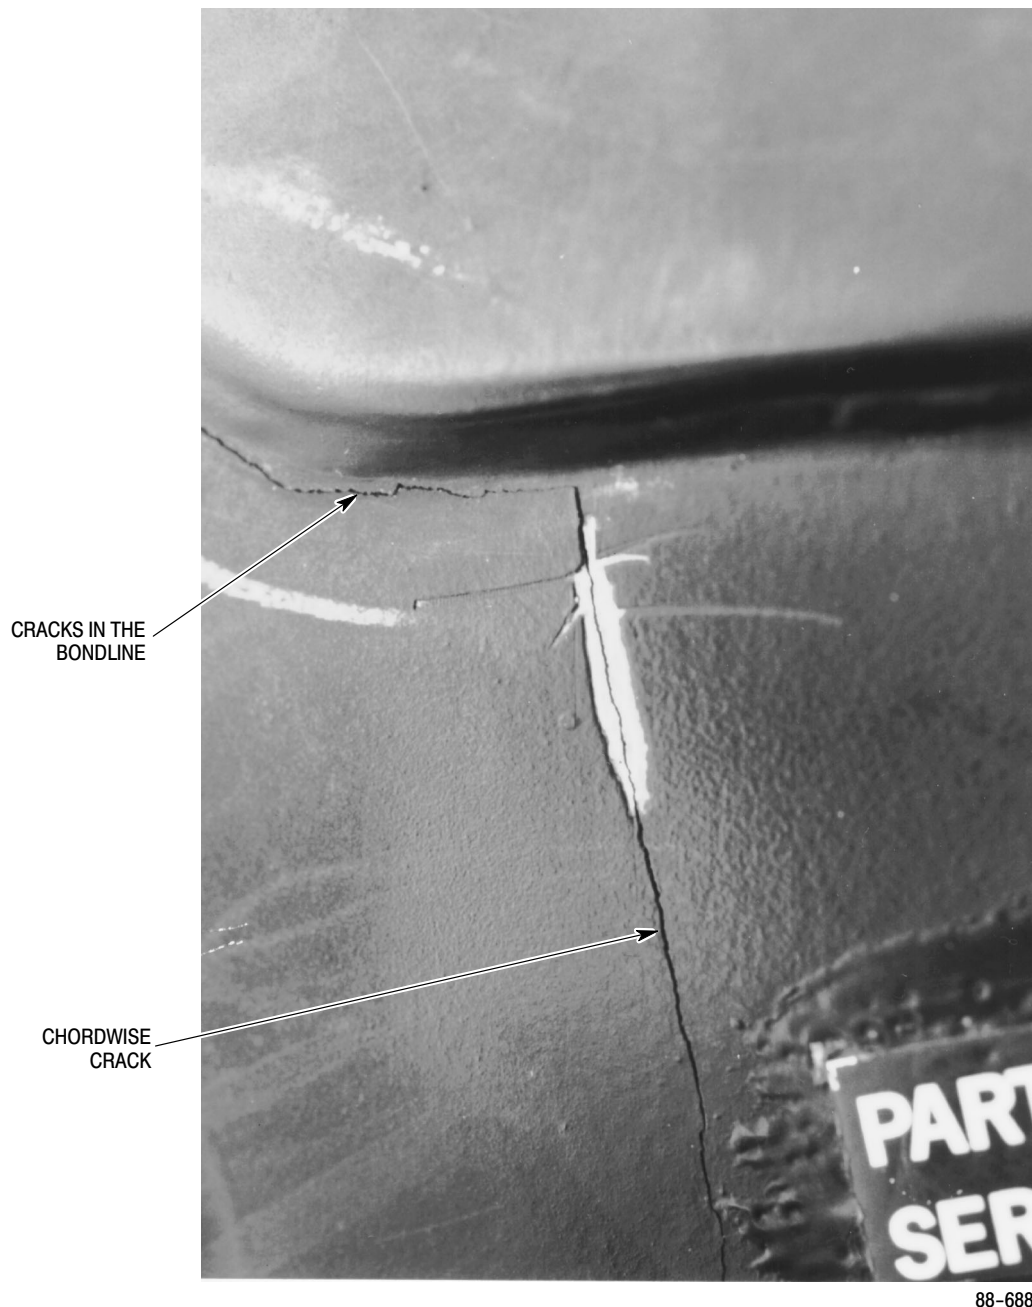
Main Rotor Blade Root Fitting Inspection.
